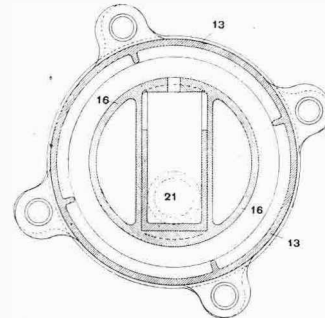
This drawing shows the detail of the ram 17 and the eccentric 16 in cross section. It is a transverse section through the ram and eccentric
